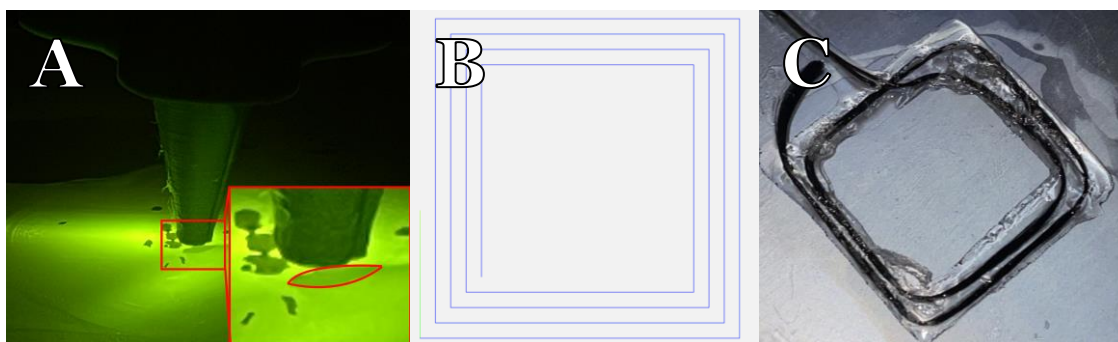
Print head MkI (a) shadow pattern, (b) intended sample path, and (c) printed sample
